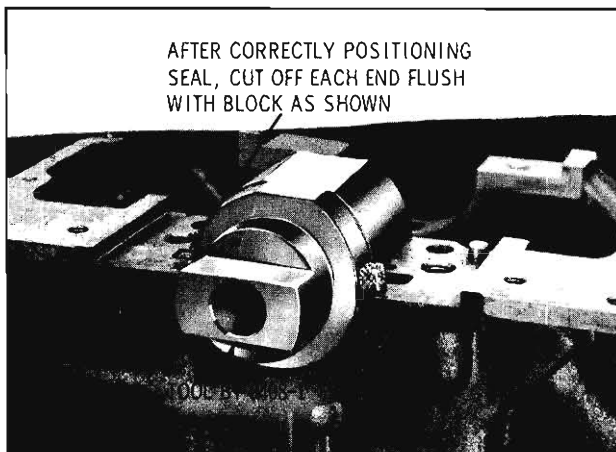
Installing Rear Main Oil Seal-Upper Half
